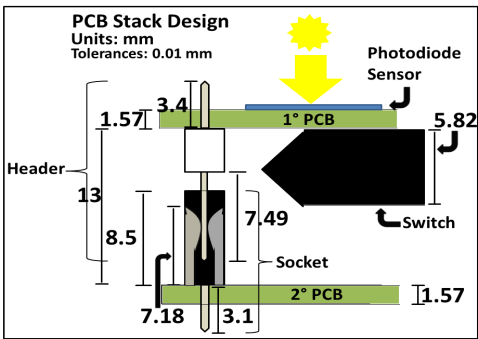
Assembled front-end PCB for ARBOL telescopes
